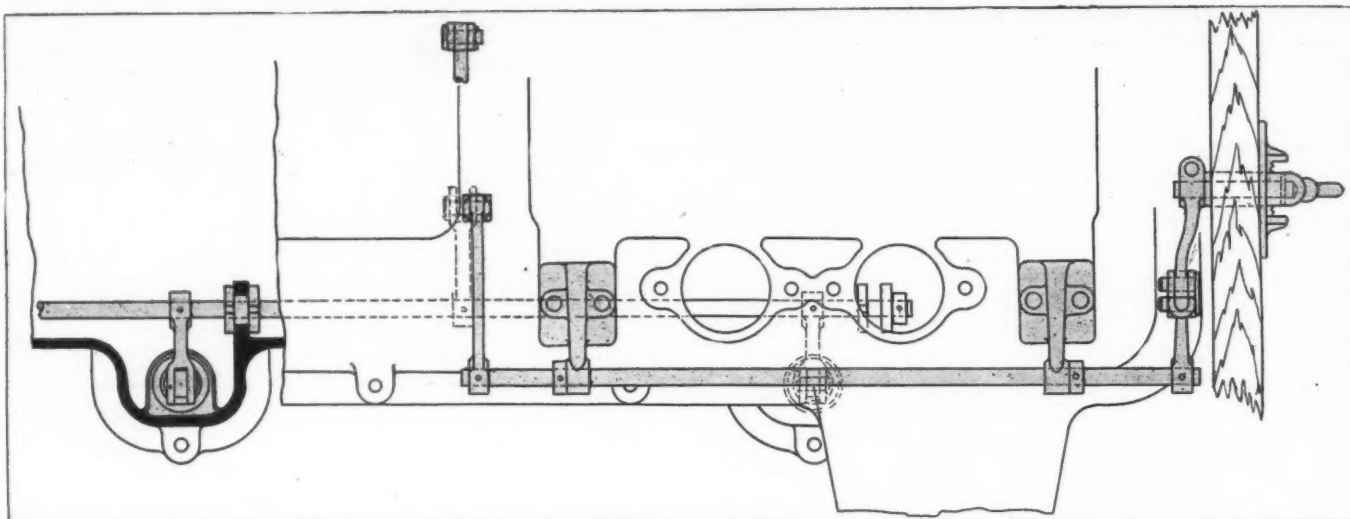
Plan view of the new oil level adjusting device fitted to the model 4-44 and 6-66 Pullman cars for 1913
